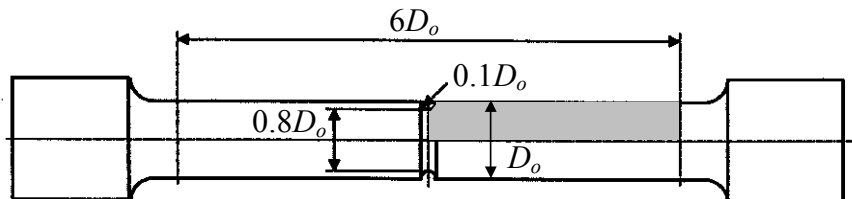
Cylindrical tensile specimen with a notch.
